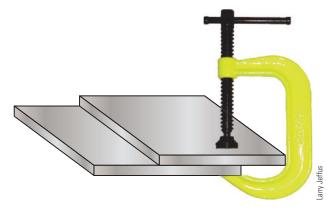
C-clamp being used to hold plates for tack welding.
